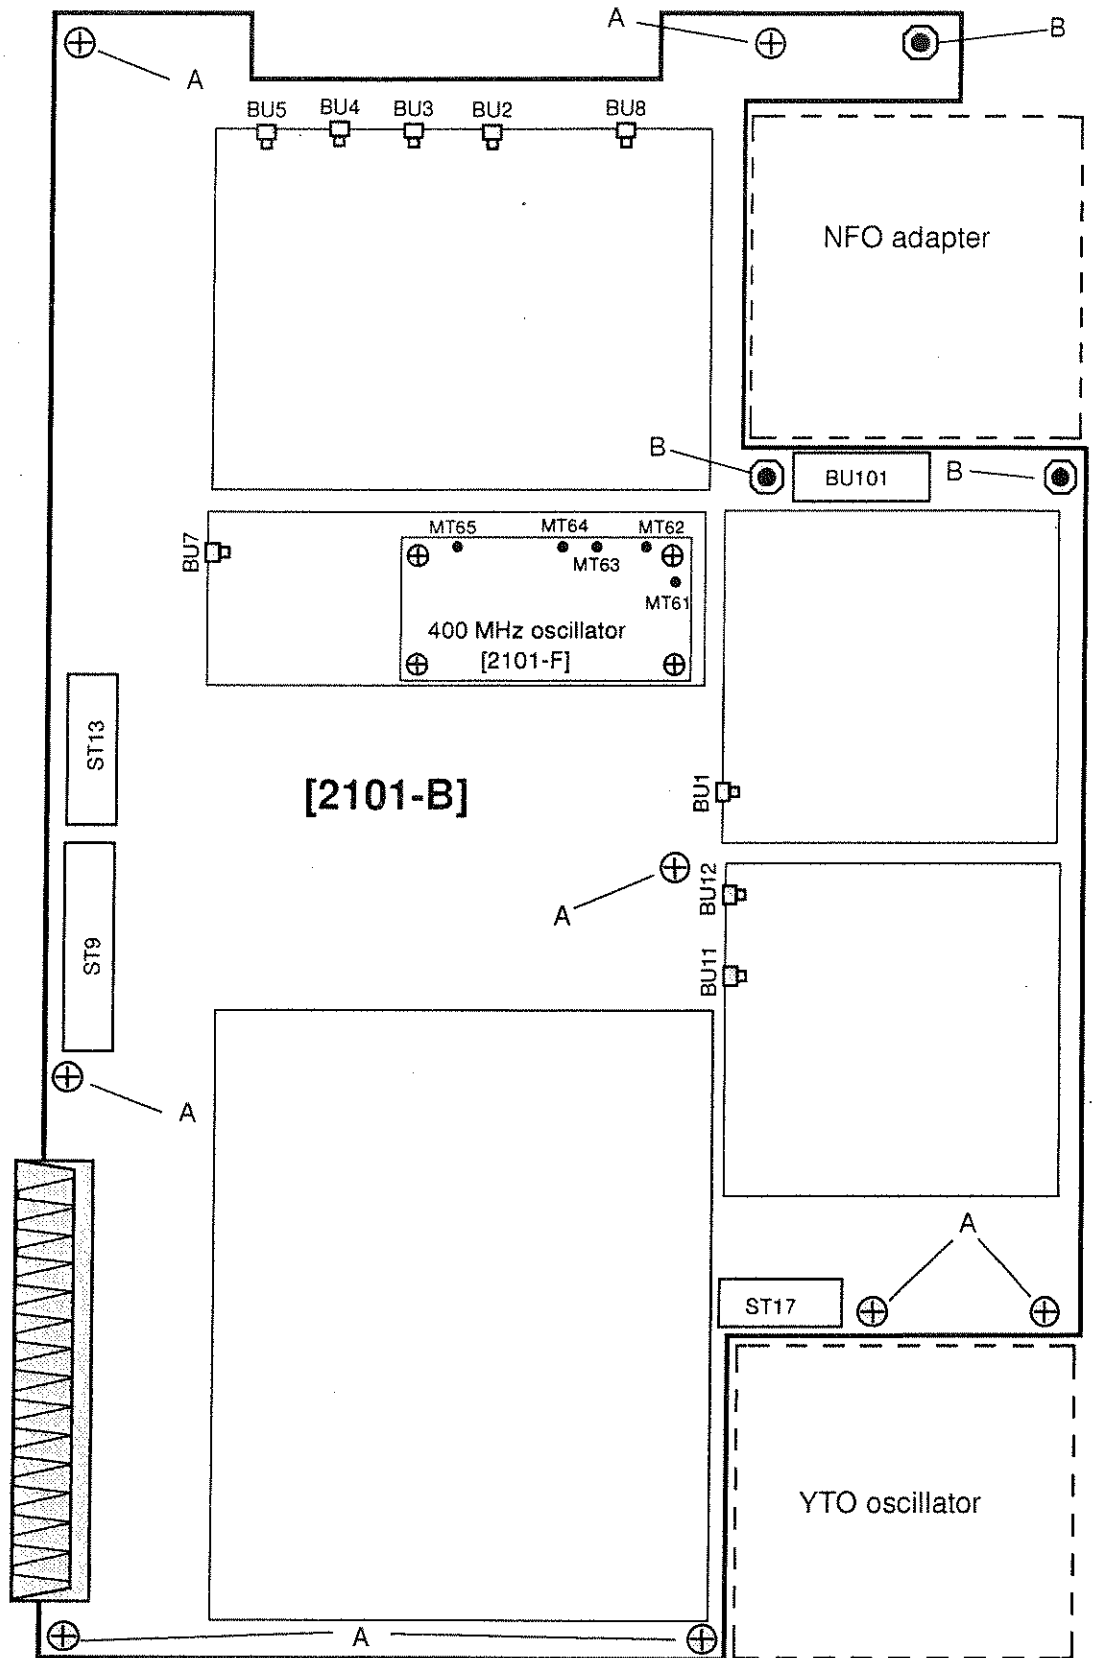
Positions of fixing screws, plugs and sockets on circuit board [2101-B]
